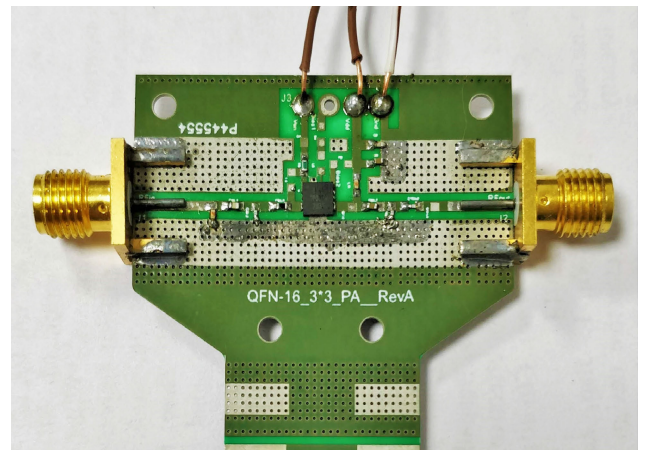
16L-QFN 3 × 3 packaged LNPA assembled on a Rogers RO4350B board.
